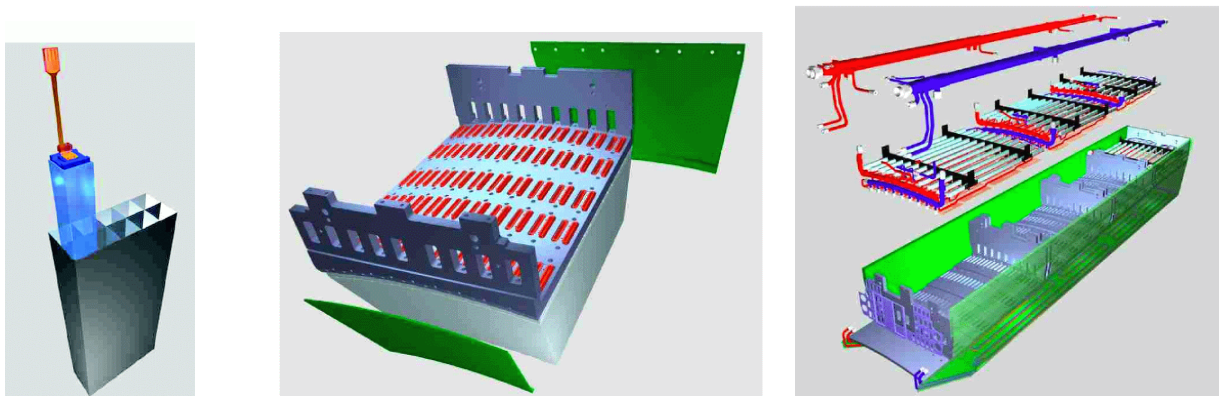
ECAL super-module assembly. Left : Alveolar structure during insertion of the first crystal; Centre : Complete module; Right : Expanded view of a super-module with cooling circuits.
